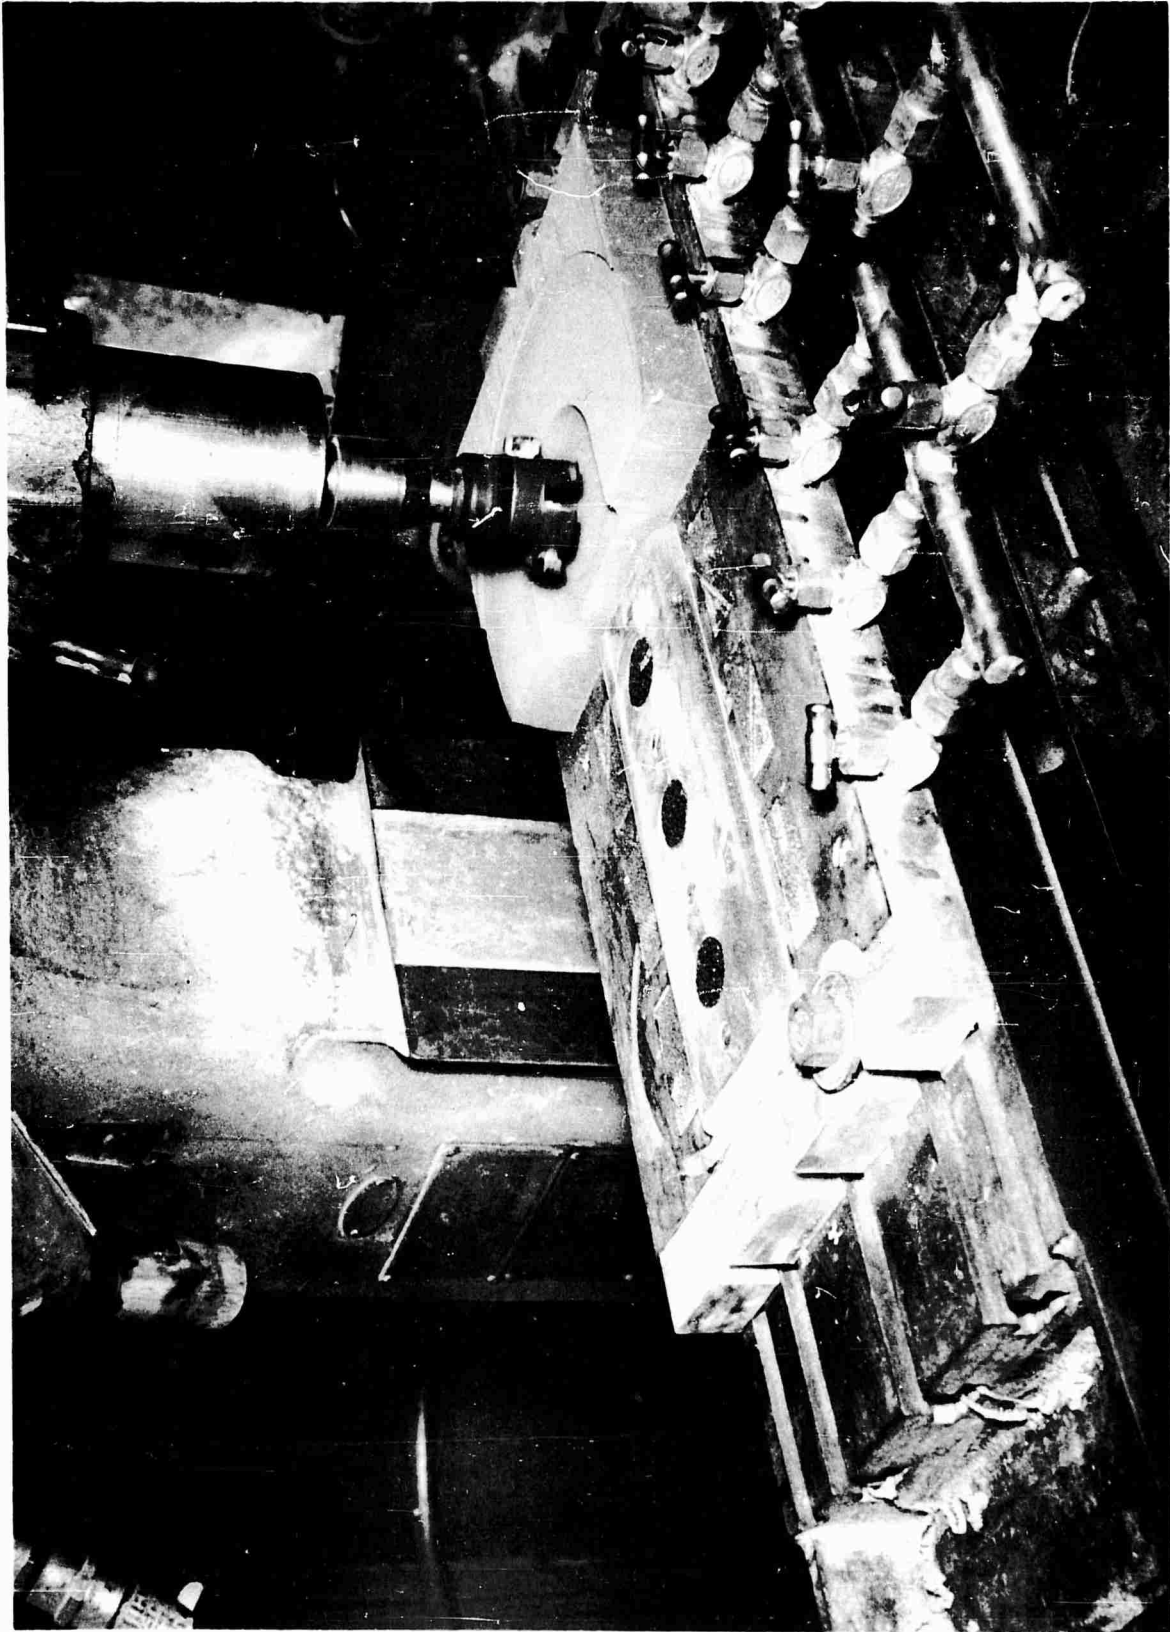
Machining of First Side of Block of Propellant Using Vacuum to Hold Block in Place
